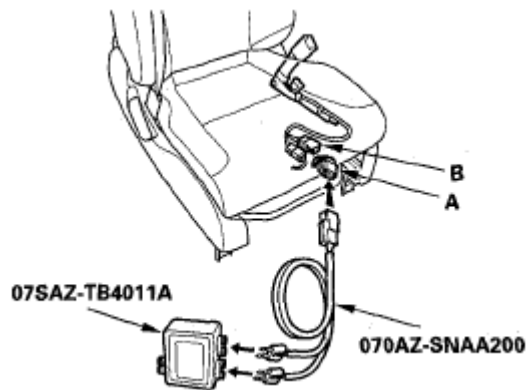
Identifying Floor Wire Harness 4P Connector And Front Passenger's Seat Belt Buckle Tensioner Connector
